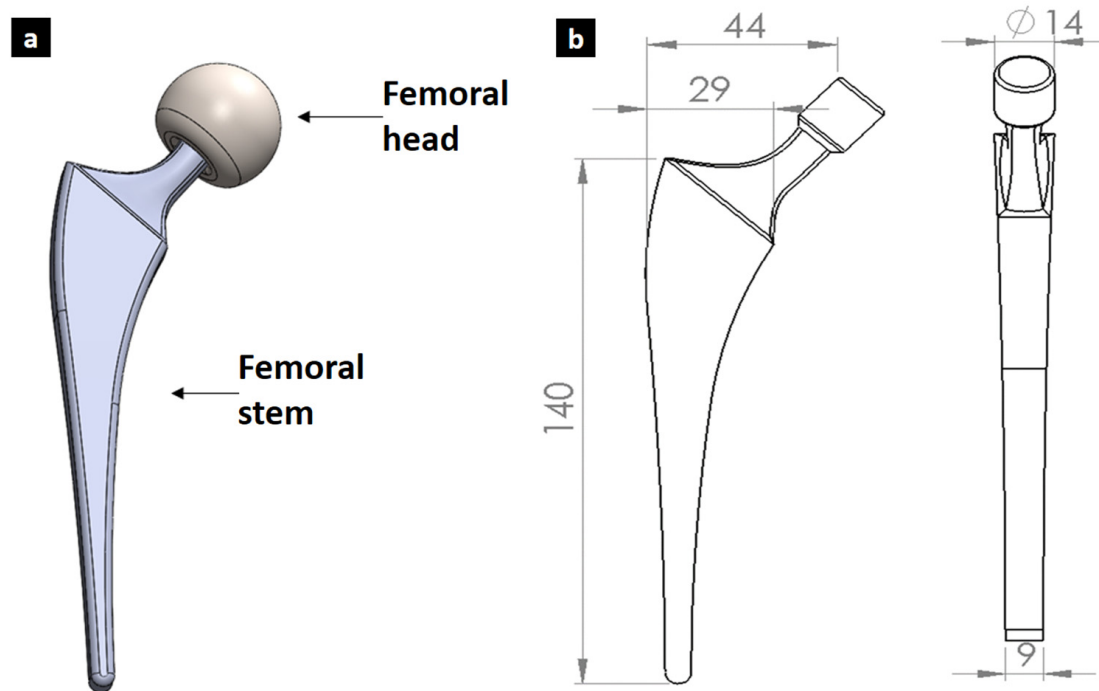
Initial design of femoral implant designed showing (a) assembly and (b) geometry with dimensions in mm.
